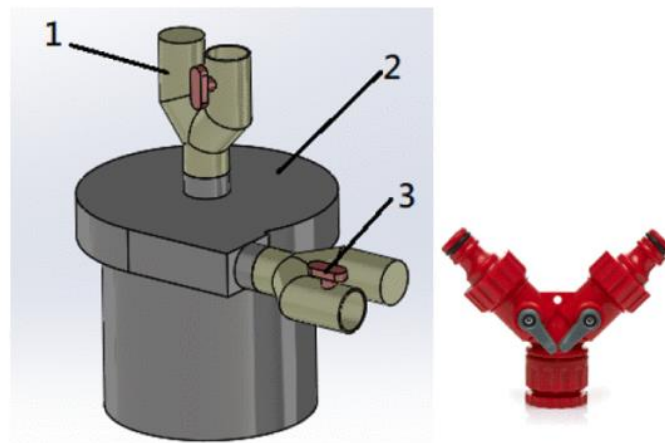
SolidWorks 3D model and real y-shaped valve [8]
